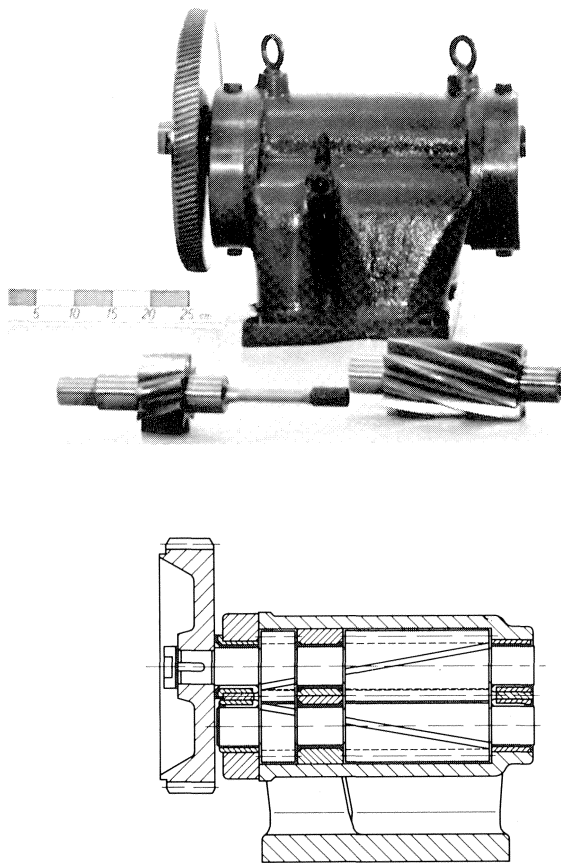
Gear Type Pump With Separated Sections for Lube and Control Oil
